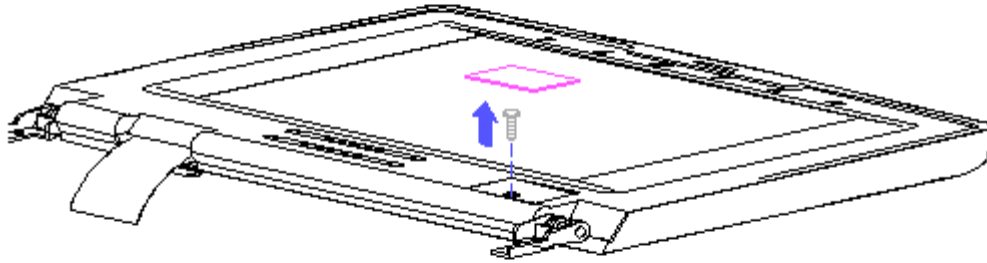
Removing the Logo Plate and Screw on the Display Panel Assembly
